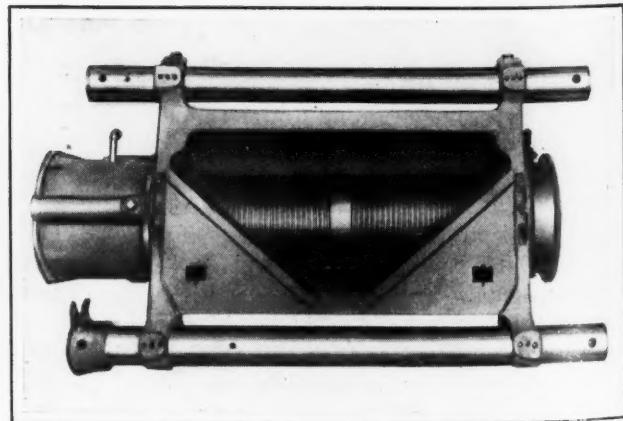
Under Side of Steel Crane Trolley Shown in Fig. 1
